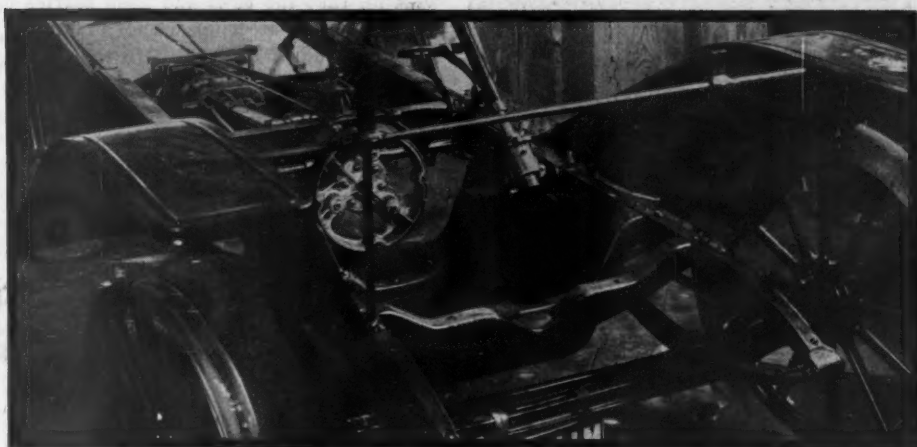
FORWARD FRAME CONSTRUCTION OF R. C. H. MODEL F, SHOWING DROPPED CROSSMEMBERS AND UNIQUE SUPPORT FOR LAMPS
